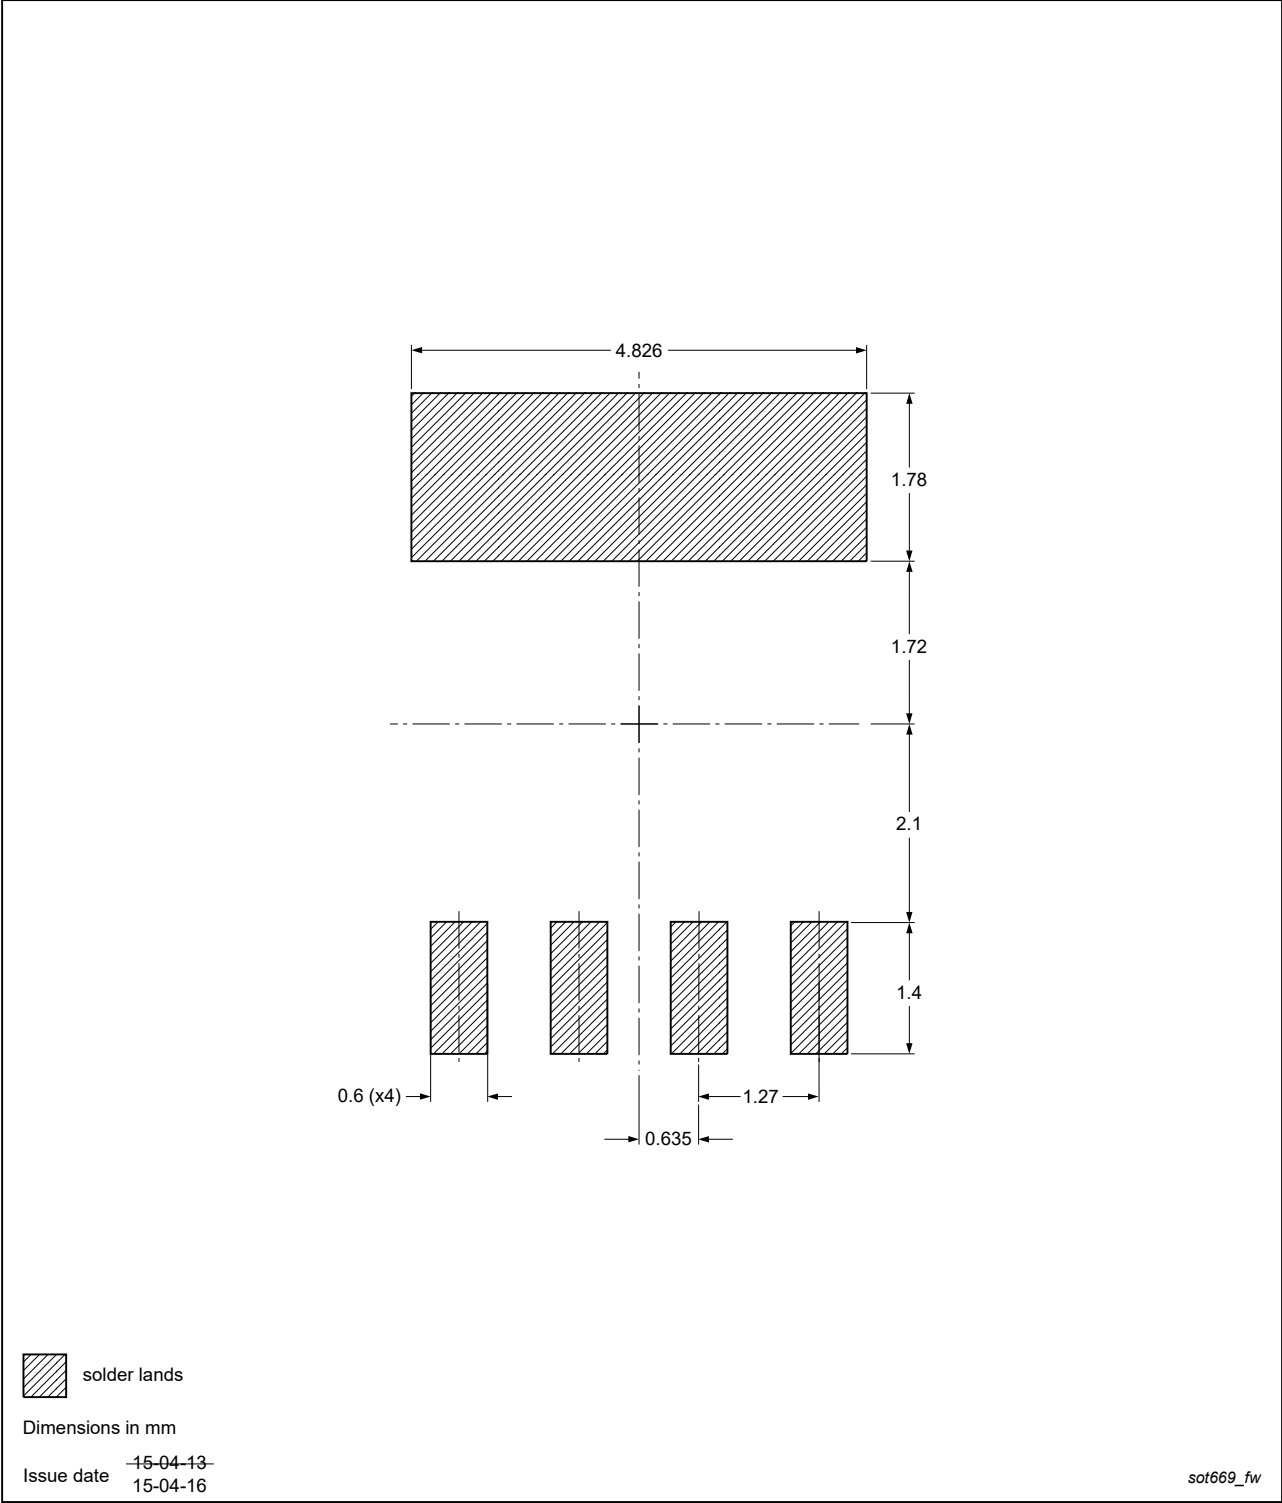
Wave soldering footprint for LFPAK56; Power-SO8 (SOT669)
